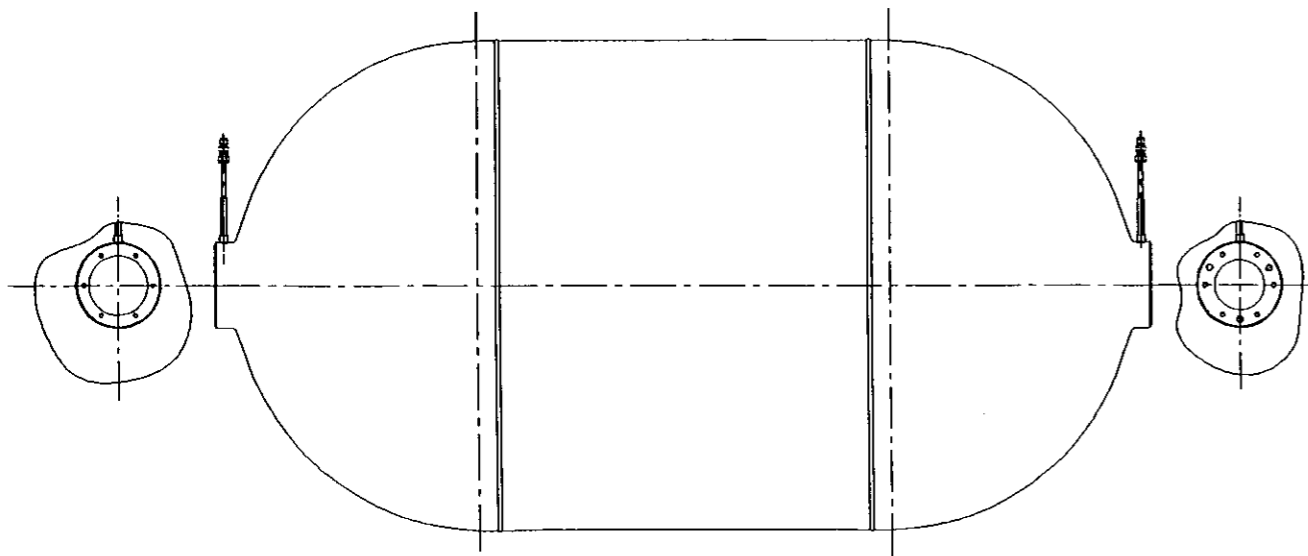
OUTLINE OF BIPROPELLANT TANK ASSEMBLY
